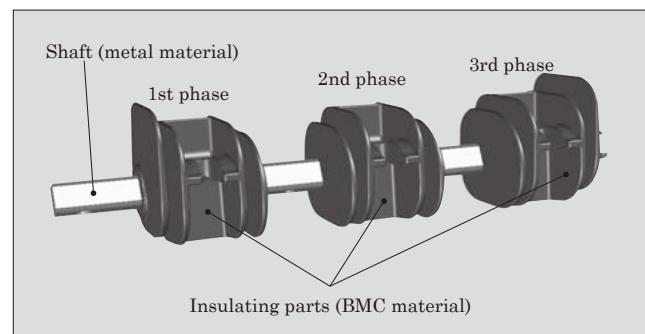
Molded parts on the insulation shaft of "MULTI.VCB"
